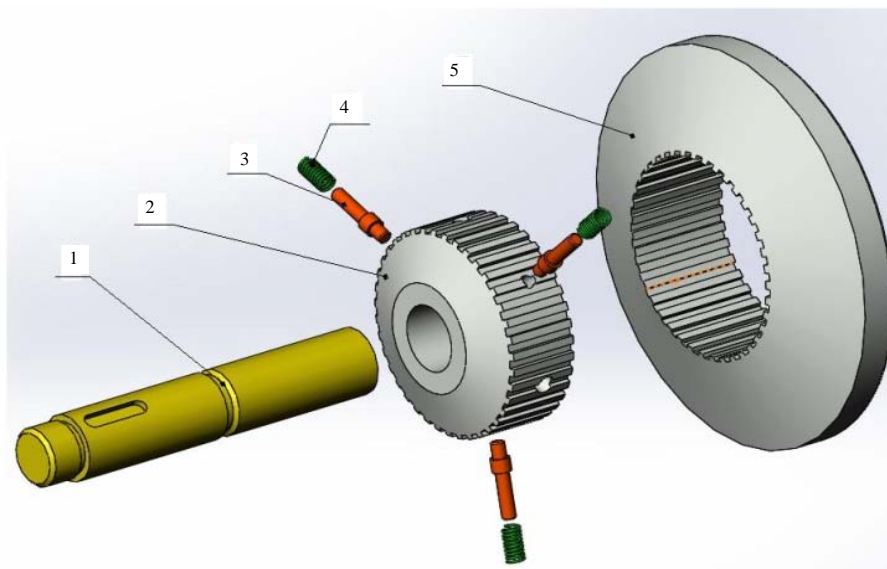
Interlock: 1) Groove on the shaft; 2) Hub; 3) Locking pin; 4) Cylindrical spring and 5) Outer section
